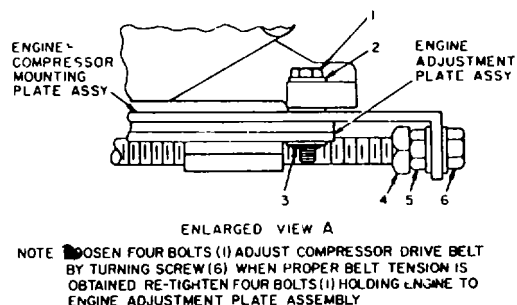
A. Compressor Drive V-Belt Adjustment and Engine Mounting
